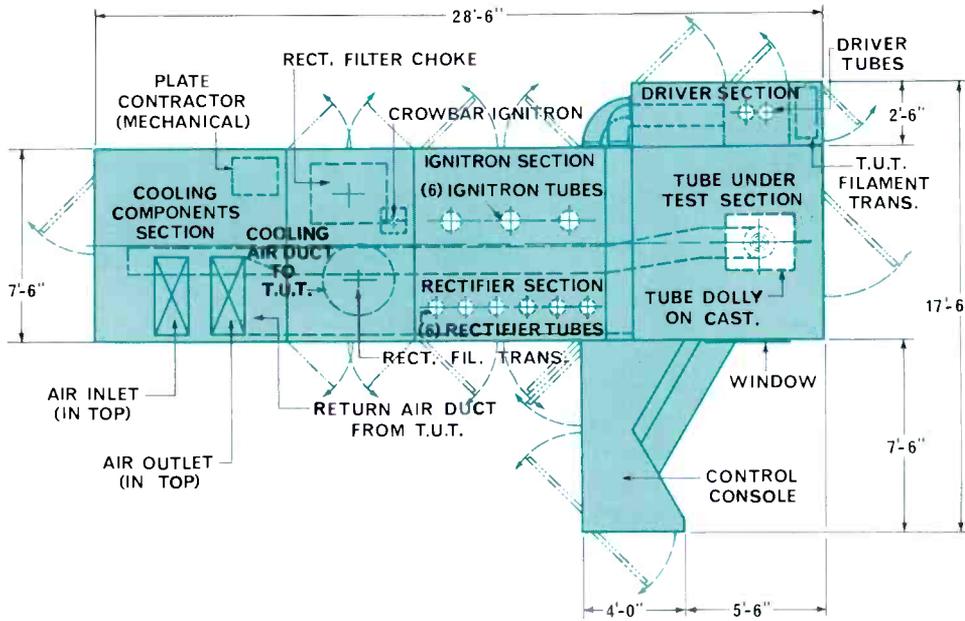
Plan view of 1.2 MW test unit outlining general shape.
